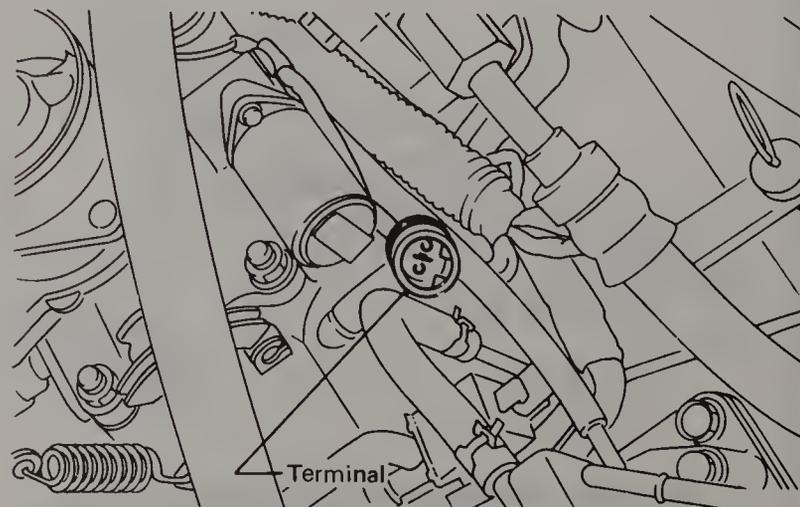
The voltage for the fuel injector should be checked on the wiring harness side of the connector (Sec 8)
